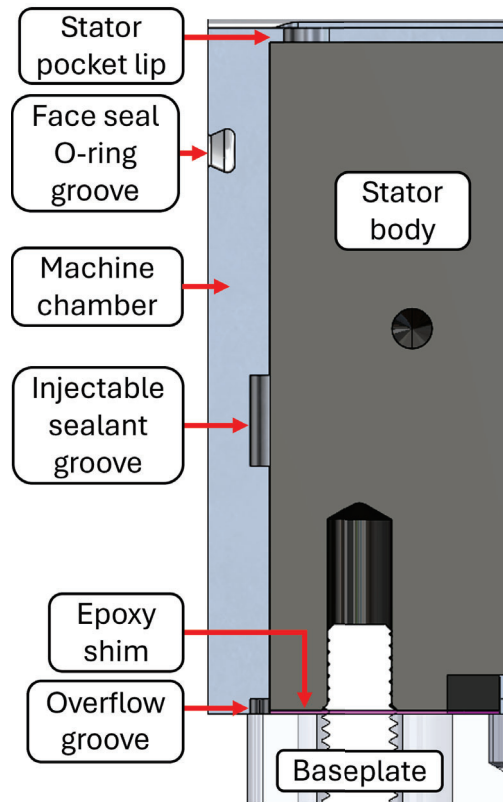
Key features for the stator pocket include the pocket lip used to position the stator during assembly, the O-ring groove used to seal consecutive chamber units, the sealant groove for creating a vacuum seal between the stator pocket wall and the stator, the epoxy shim used to ensure the baseplate and the stator are both bolted to the baseplate regardless of dimensional errors within their respective tolerances, and the epoxy shim overflow groove used to ensure that any excess epoxy used in the shimming process can flow away from the stator and baseplate interface rather than create too thick of a shim.
